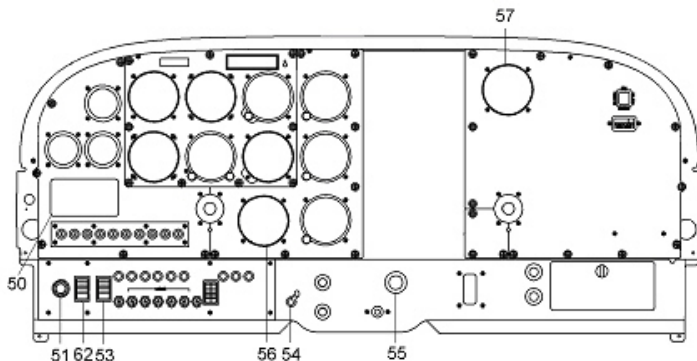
Example of Instrument panel with TAE 125 installation with switch Alternator
